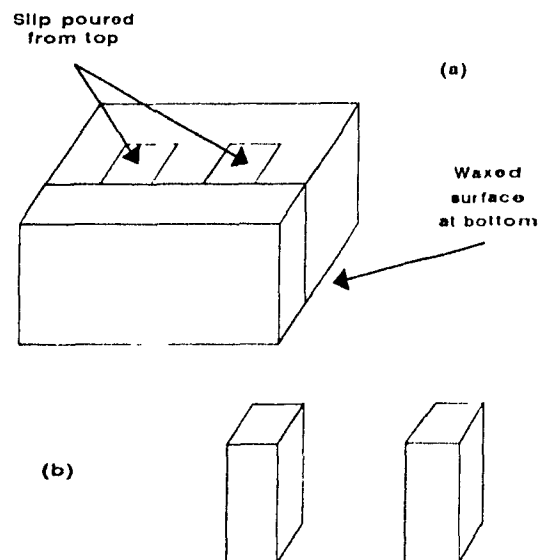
(a) Clamped mould assembly, (b) Casts obtained
